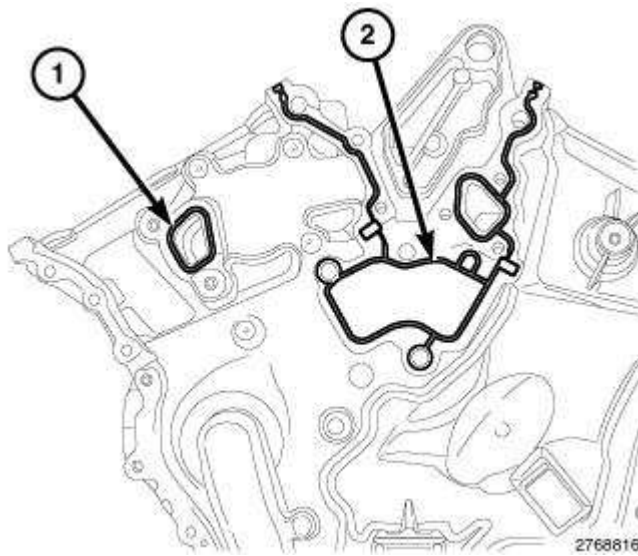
Coolant Outlet Housing Gasket & Water Pump Gasket
